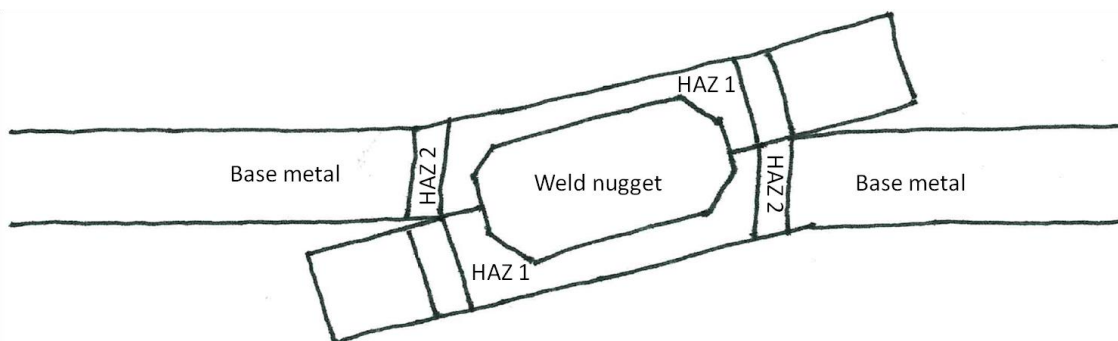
Schematic representation of a tensile test piece with a resistance spot welded joint in advanced high strength steels. Indicated are the weld nugget, the region of the heat affected zone that has transformed into austenite during welding and into martensite during cooling, HAZ1, and the region of the heat affected zone that has not transformed into austenite but has been tempered, HAZ2.
